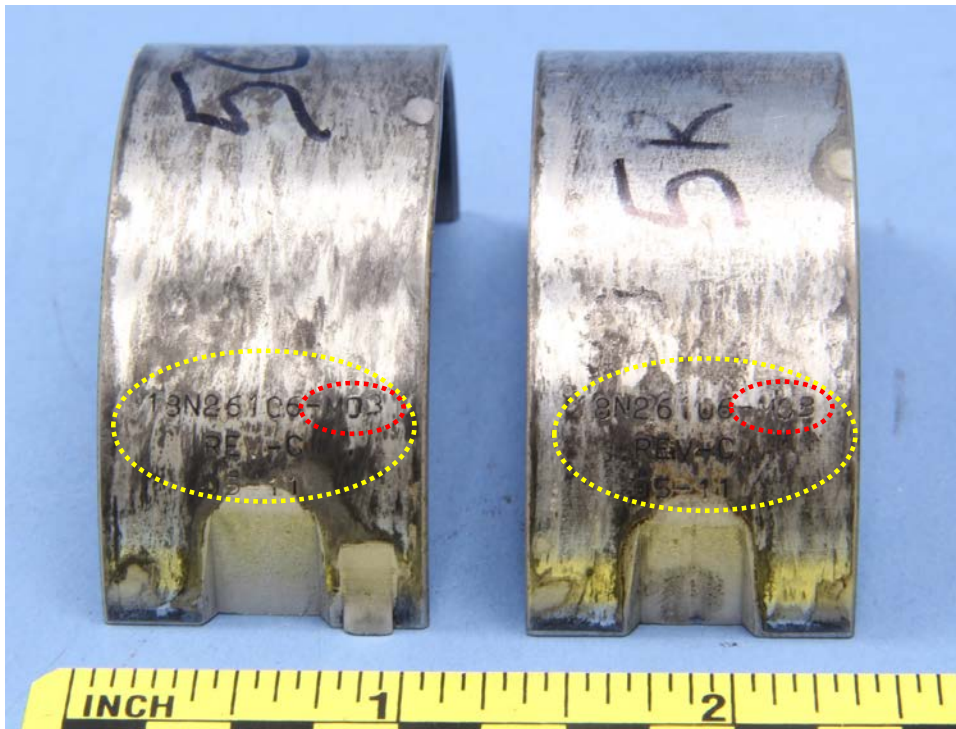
Close-up photo of the part markings (yellow dotted circles) and the 'M03' code (red dotted circles) on the sides of the connecting rod bearing.
